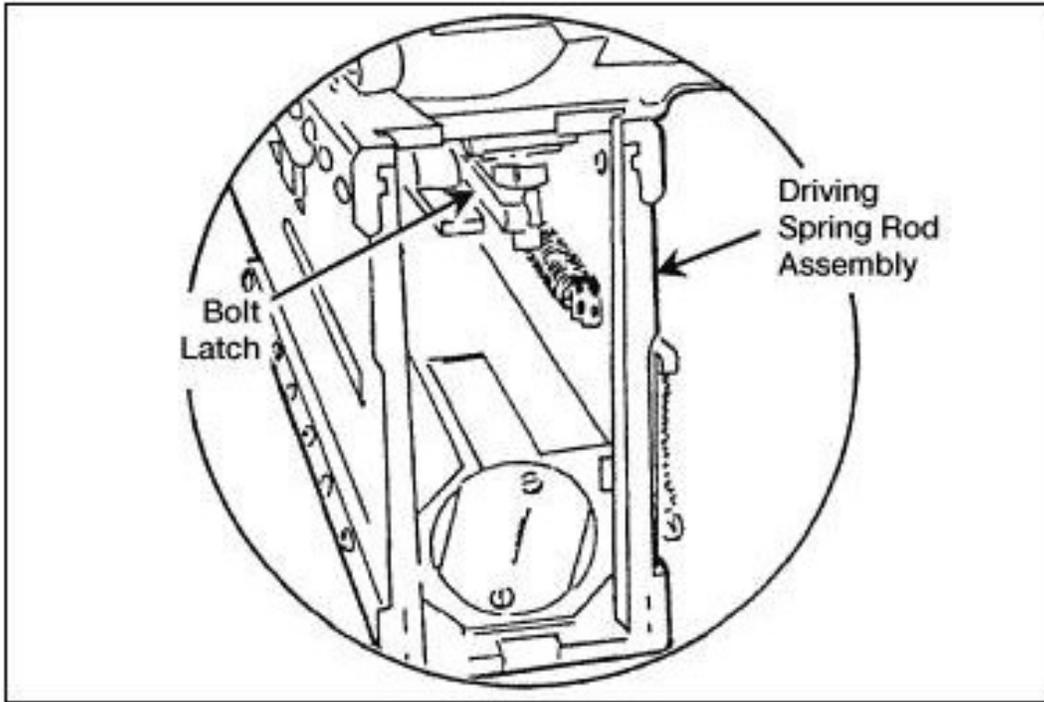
ST-1025_05 (Removal of the driving spring rod assembly)
